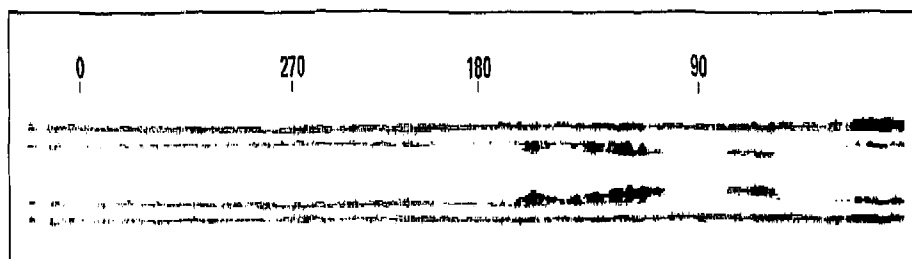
Ultrasonic "C" scan of weld region of vessel B. The extent of the dark area indicates the entire weld is "bad".
